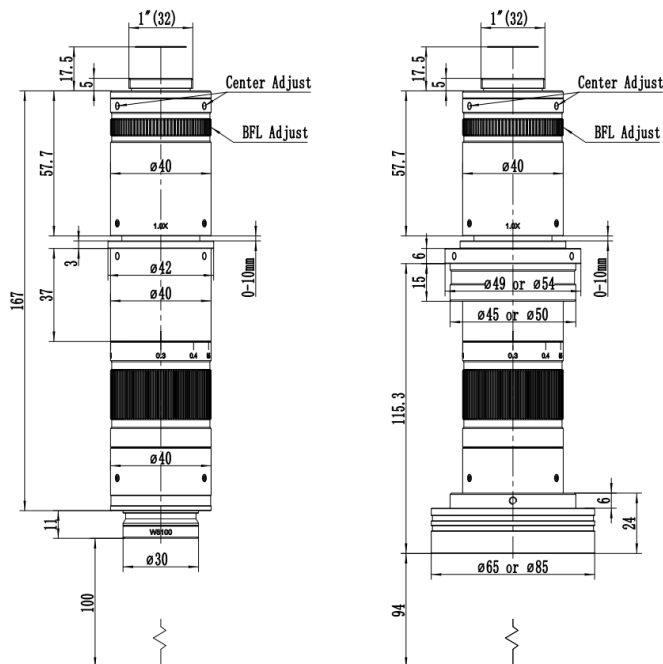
Dimension of TQM0325-W5100-TV5100 (Left)
